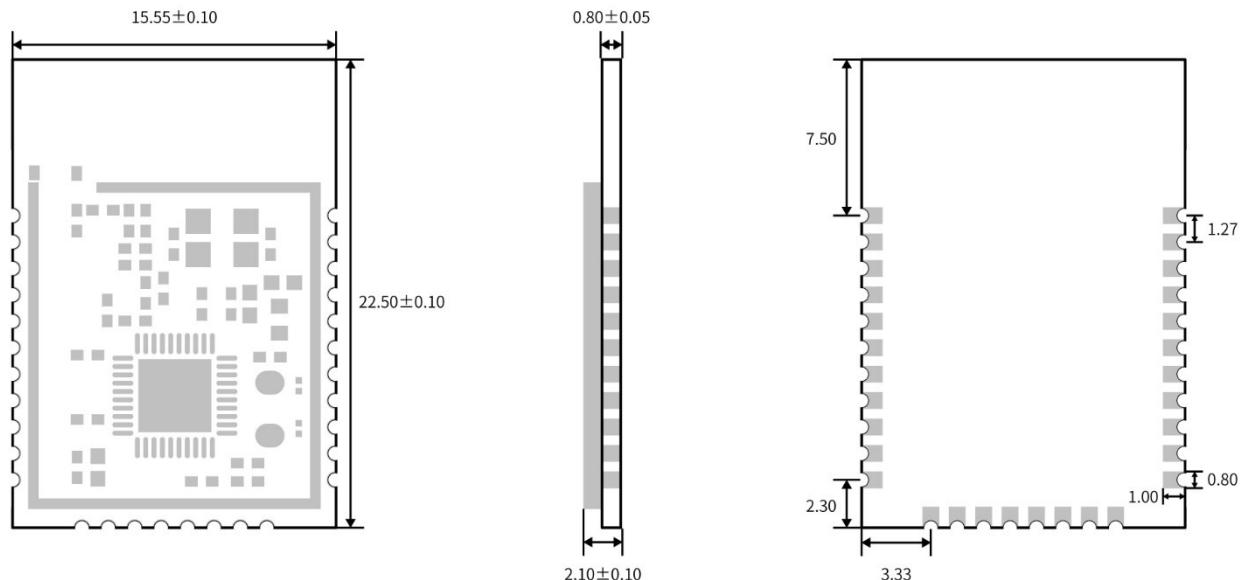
Recommended PCB Footprint of RF-BM-2340B1
